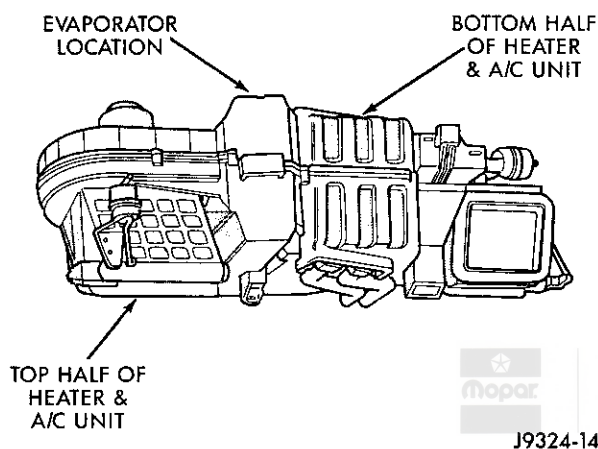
Evaporator in Heater-A/C Housing (Upside Down)
